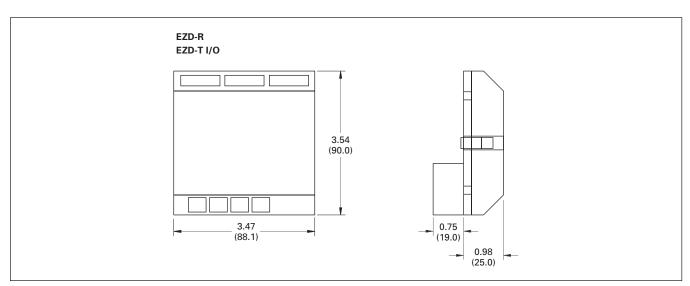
EZD-R/EZD-T I/O Module Dimensions in Inches (mm), Drawing Number MD05013007E
